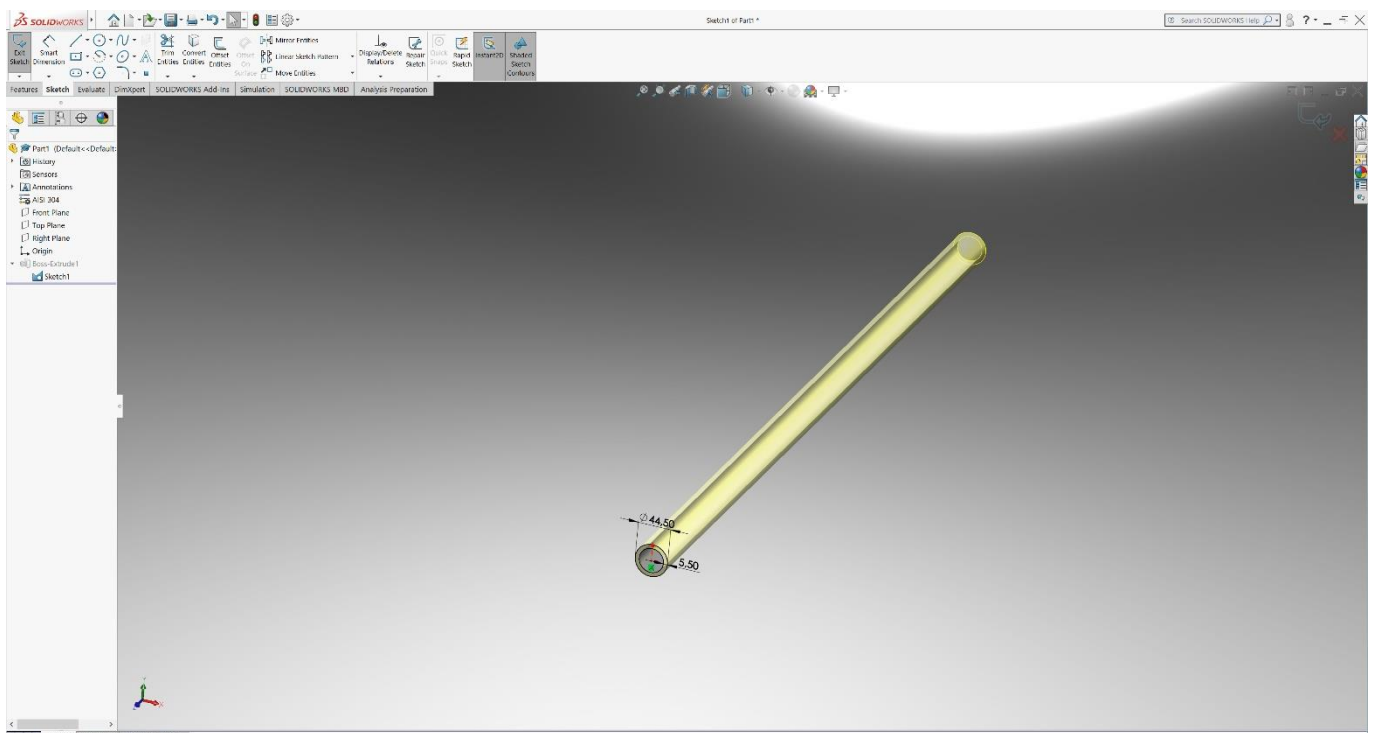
The profile of the tube is extruded in the first extrusion, removing the possibility of reducing the geometry without suppressing the entire extrusion.
